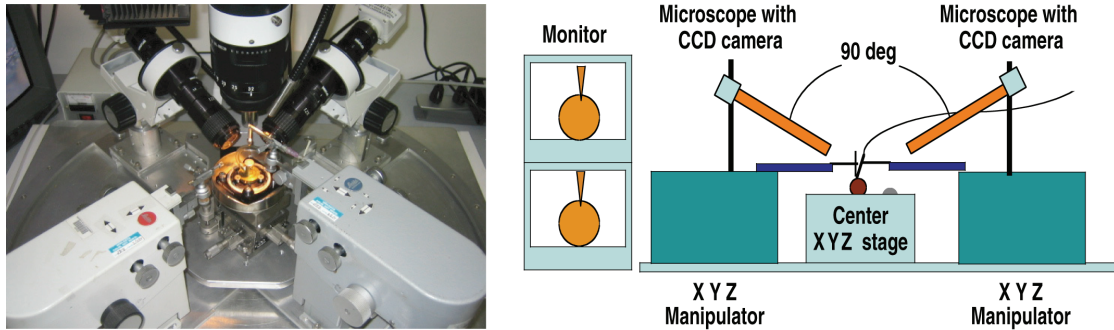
A picture and schematic of the assembly station setup used to attach the fill tubes to the shells.
